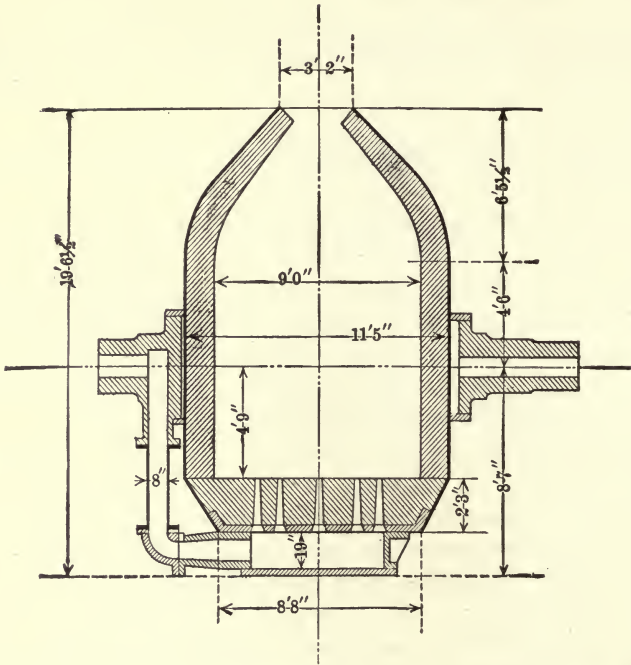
FIG. VI-A.—SECTION OF BESSEMER CONVERTER IN UPRIGHT POSITION.
